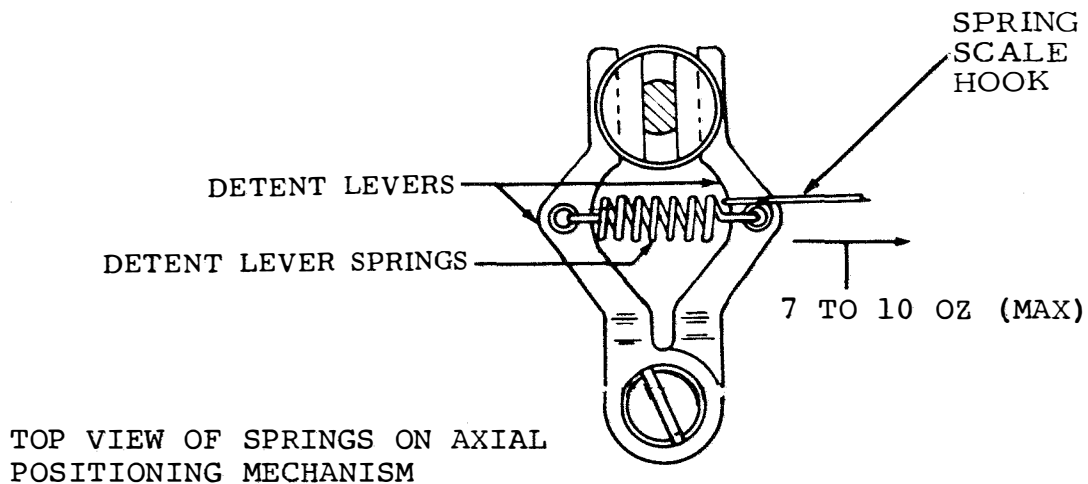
Eccentric Shaft Detent Lever Spring, Top View
